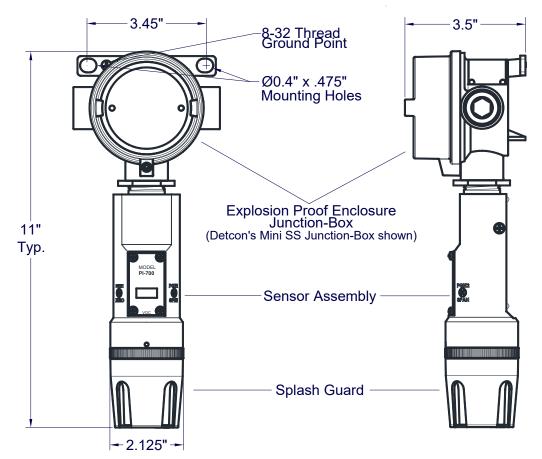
Outline and Mounting Dimensions (Mini Stainless Steel Junction Box)
